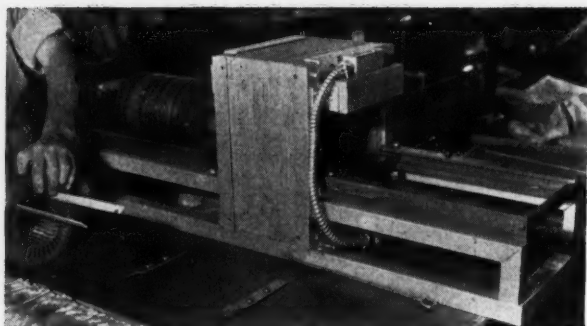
This unique contraction instantaneously separates the stator stampings so that they can be cleaned on both sides in the automatic cleaning machine.
